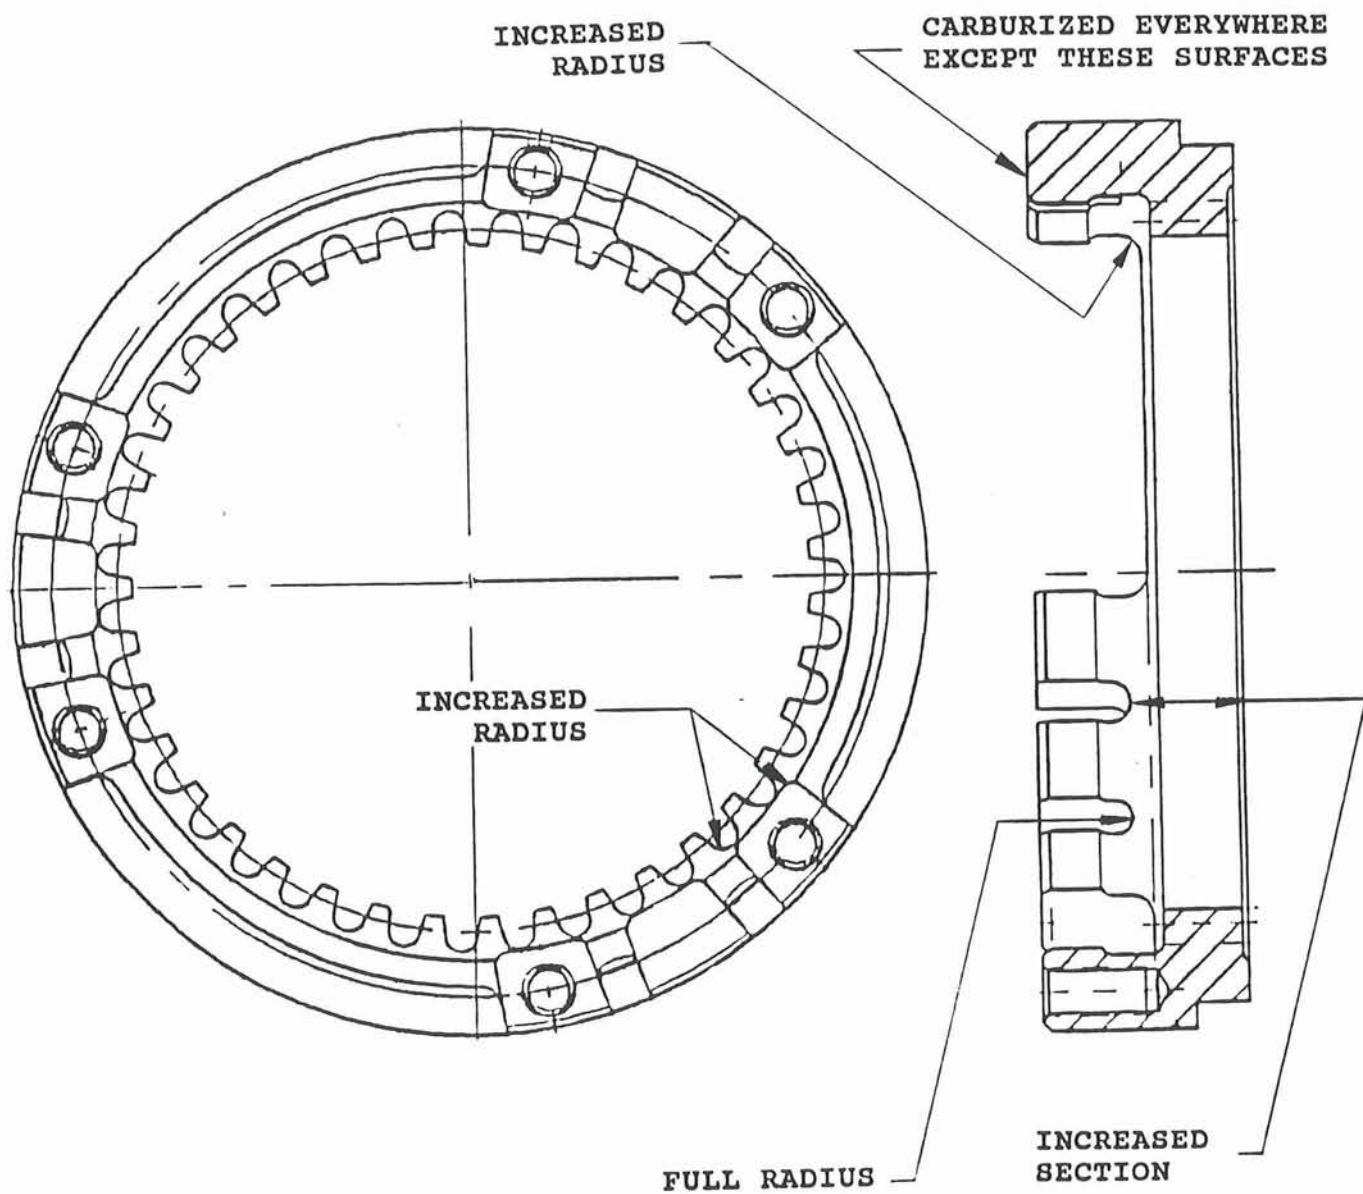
Improved Rotor Gear - NJ12484 Rev. C
